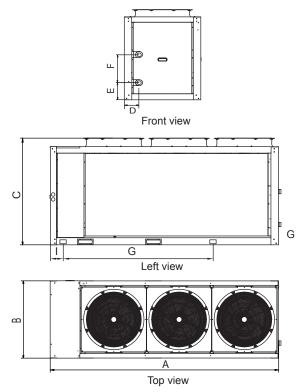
outline dimensional of HTW-MCSU90RN1L
